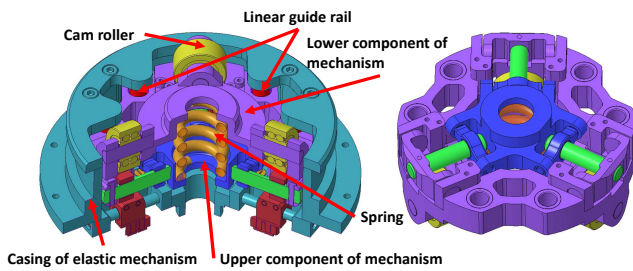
The appearance of the elastic mechanism: (left) bottom view of the elastic mechanism with casing, (right) top view of the elastic mechanism without casing.
